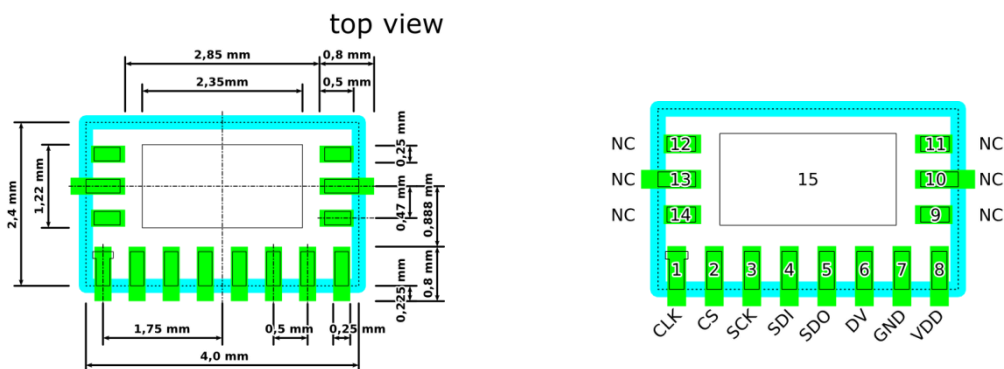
Measurements and layout of a footprint for horizontal soldering.
